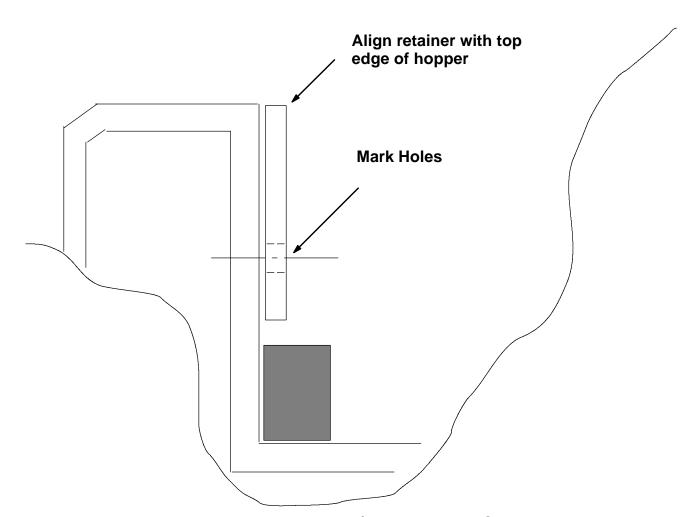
RETAINER HOLE / MOUNTING LOCATION
